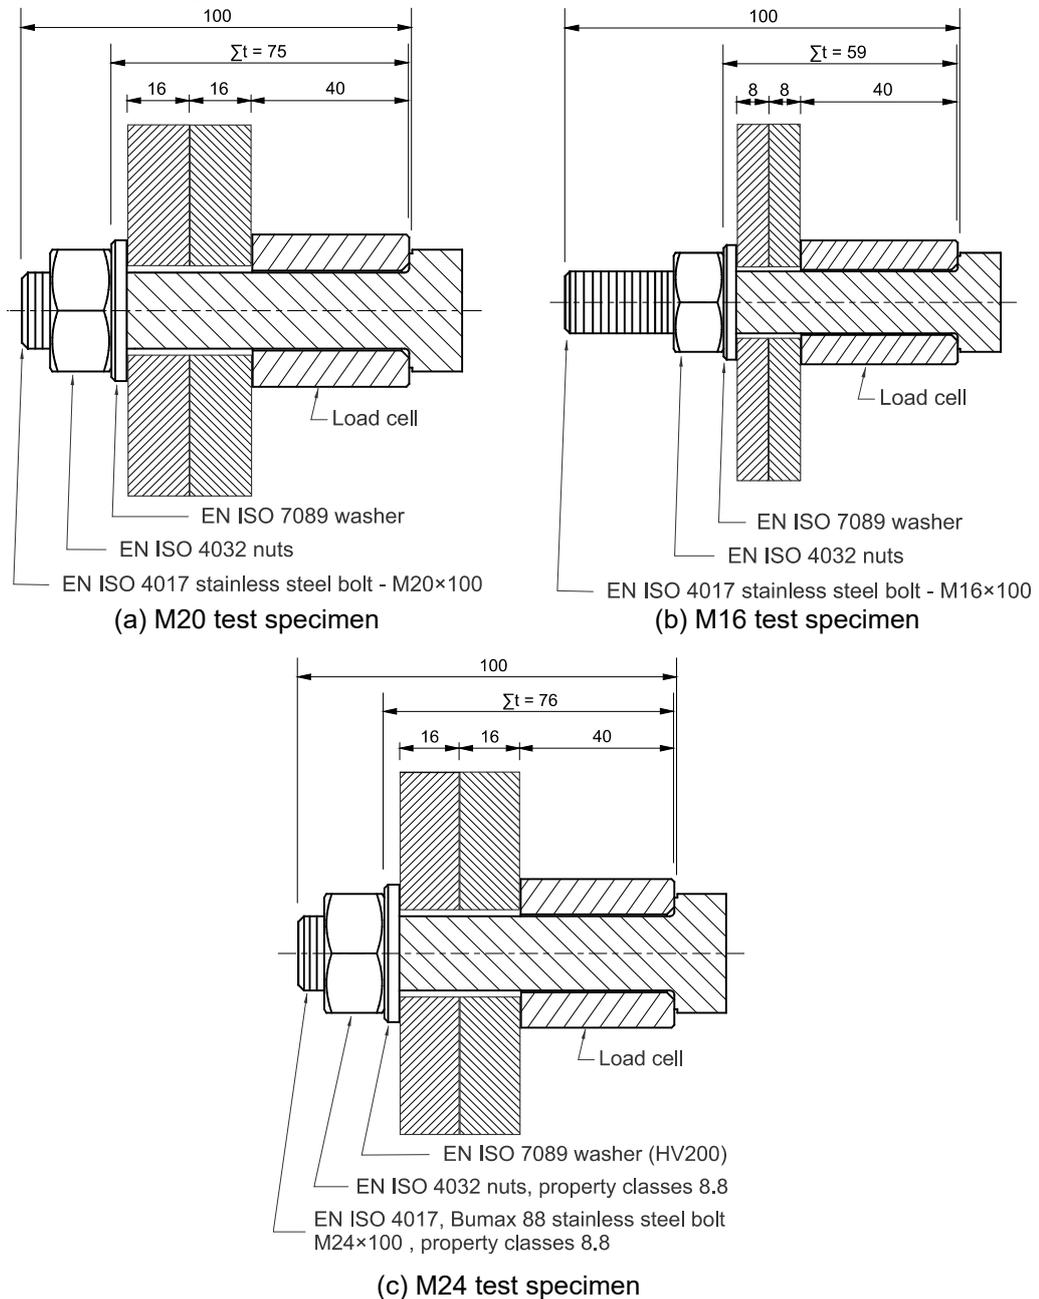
Clamping length of the stainless steel bolting assemblies for the relaxation test tests
